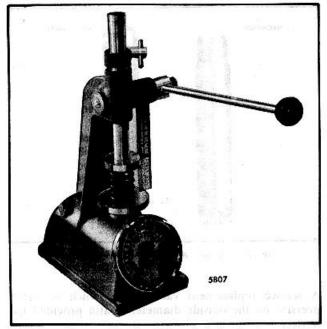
Testing Exhaust Valve Spring using Tool J 22738-02
